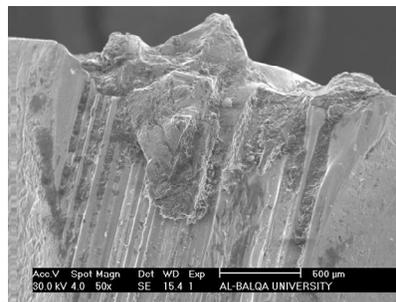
SEM images of coated tool inserts No.3 after machining at 29 m min⁻¹
